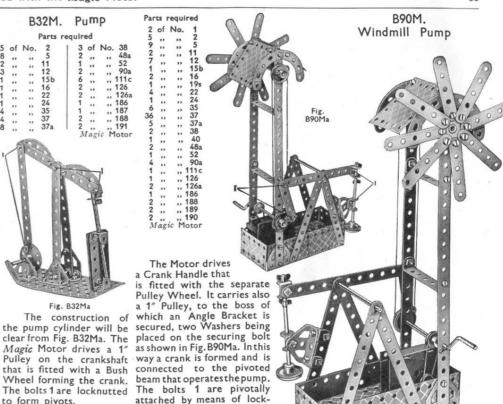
Ma The construction of Wheel forming the crank. The bolts 1 are locknutted The bolts 1 are pivotally to form pivots.
